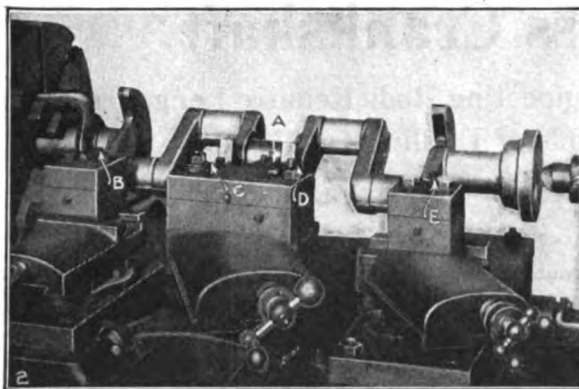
ROUGH TURNING CENTER BEARING. FIG. 3. TURNING PIN BEARINGS ON WICKES LATHE
